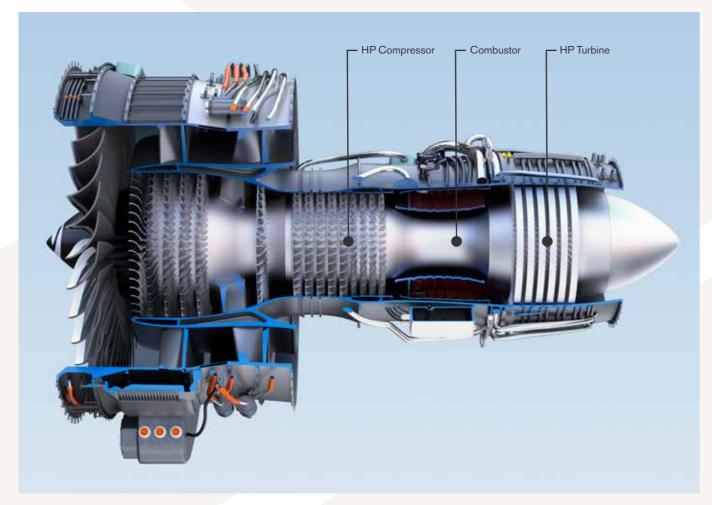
A cross-section of a modern gas-turbine engine indicating key engine components of relevance to this section.
